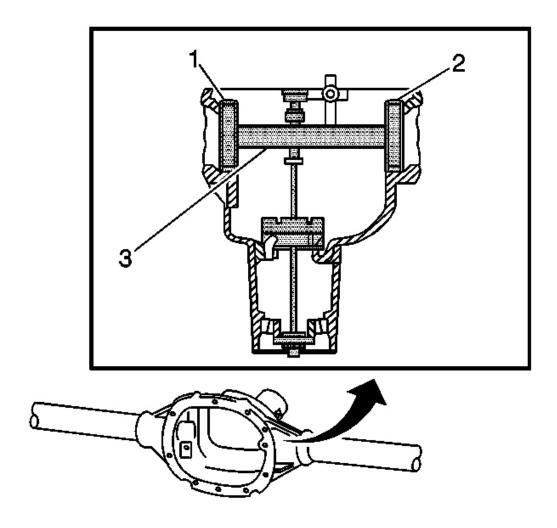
Assembling Special Tools In Differential Carrier Bore Courtesy of GENERAL MOTORS CORP.
